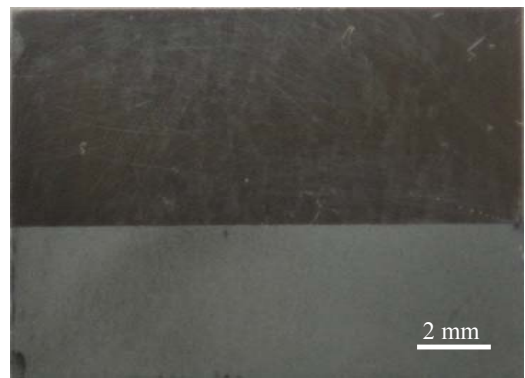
Typical picture of crossing section of welded SiC/W
